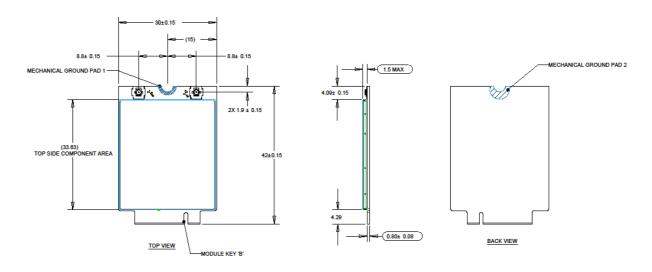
Module mechanical drawing based on PCIe M.2 Type 3042 specification
